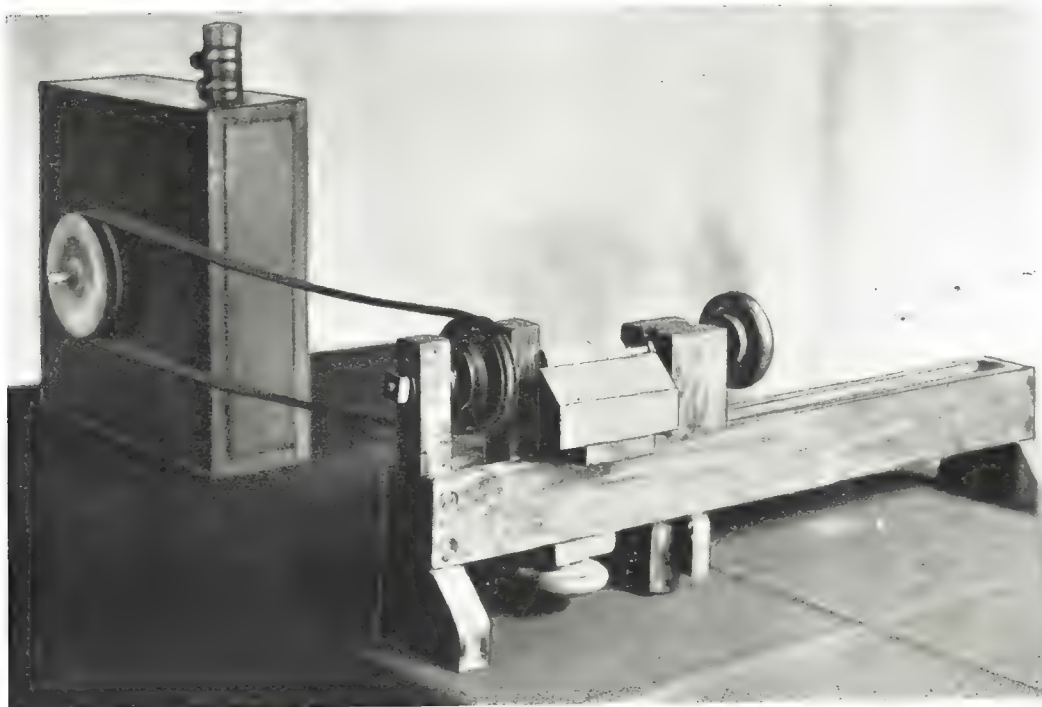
Pelton Wheel linked up to small lathe. Piece of wood in lathe actually turned and formed with resulting power.
